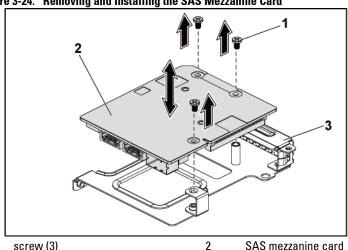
Removing and Installing the SAS Mezzanine Card
